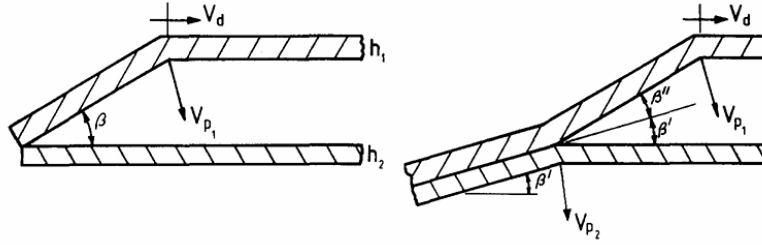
Schematic diagram showing the welding of two plates in free flight. Adapted from [35].
